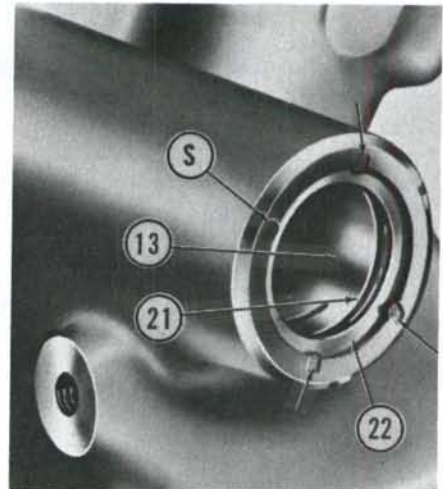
Seal retainer (22) (not used on late models) is retained in gear housing by staking (S) as shown. Oil seal (21) can be renewed without removing retainer.
